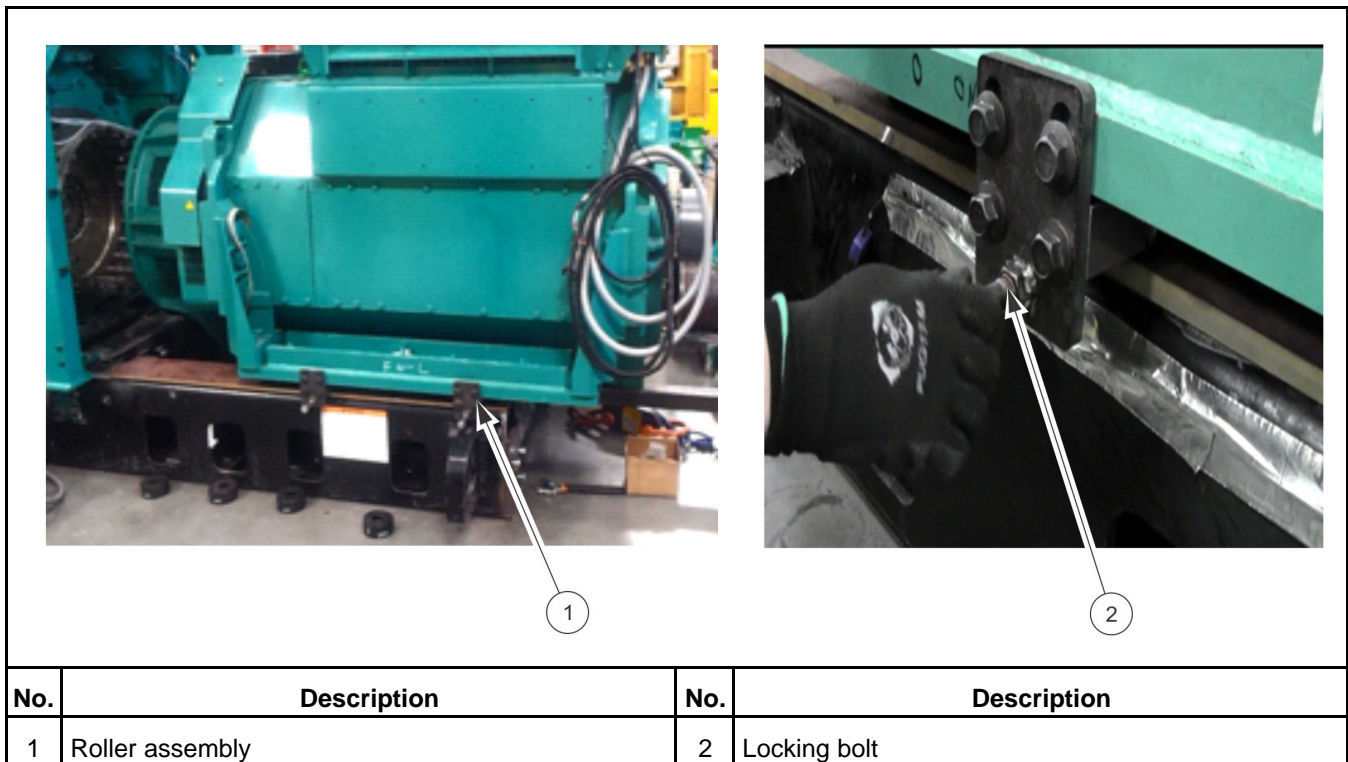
ROLLER ASSEMBLY AND LOCKING BOLT
